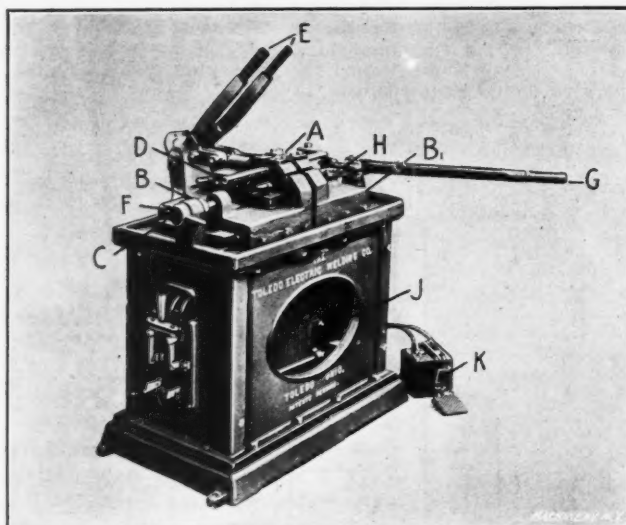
Simple Form of Machine for Welding Straight Rods or Tubes
